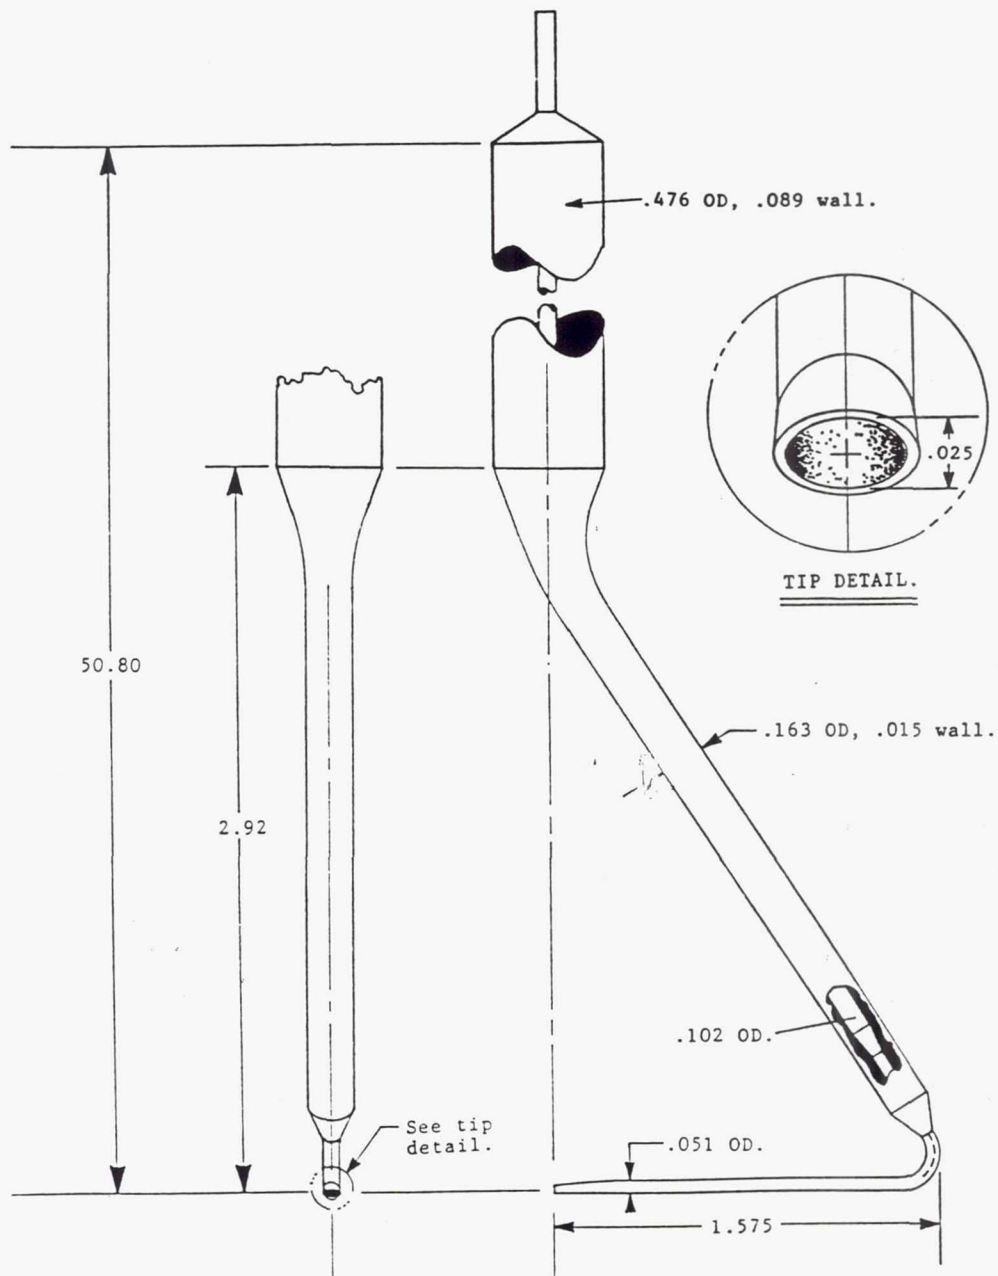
Geometry of the boundary layer pitot probe. Probe is constructed from silver brazed stainless steel tubing. Dimensions are in centimeters.
